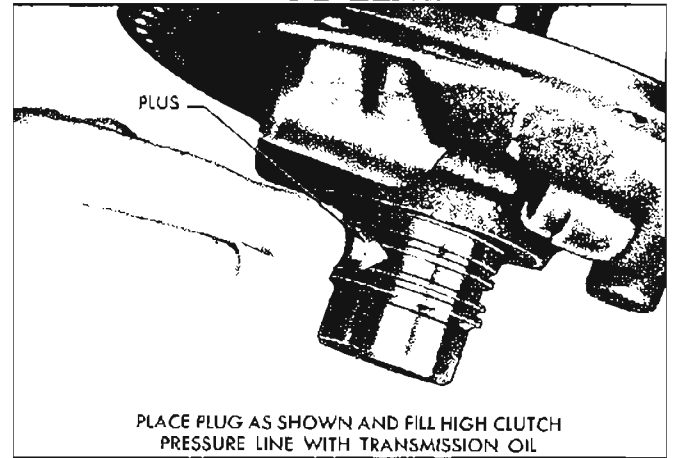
Checking Cross Leakage Between Pump Cover and stator shaft
